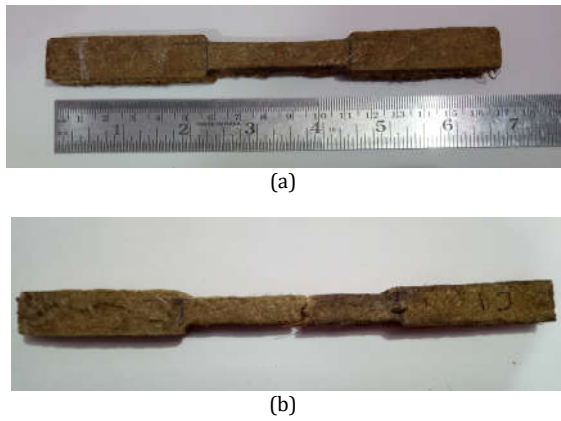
(a) Tensile test specimen, (b) Fractured Specimen
